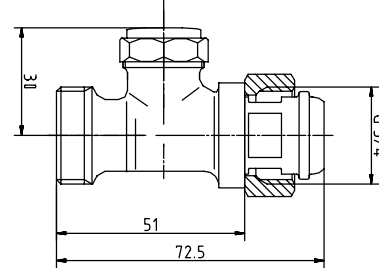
Straight with 3/4" external to 3/4" internal thread
